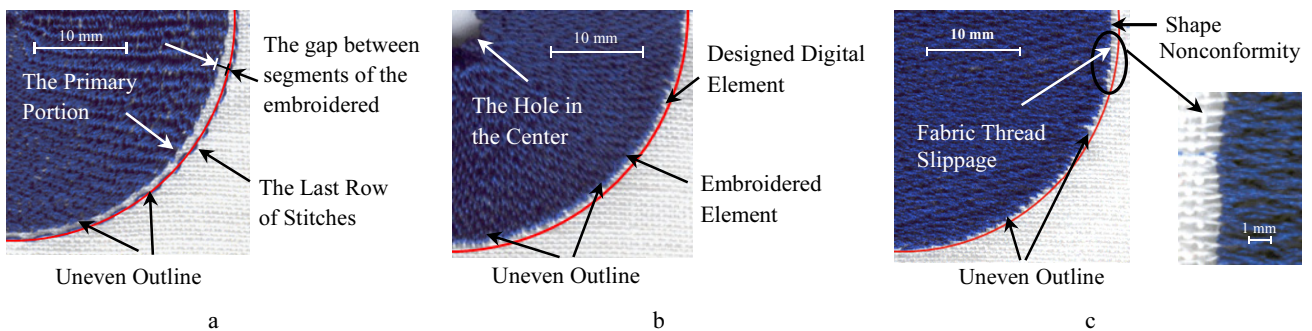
Shapes of the embroidered element formed with filling type FS, when: a – fabric F1; b – fabric F2; c – fabric F3:
